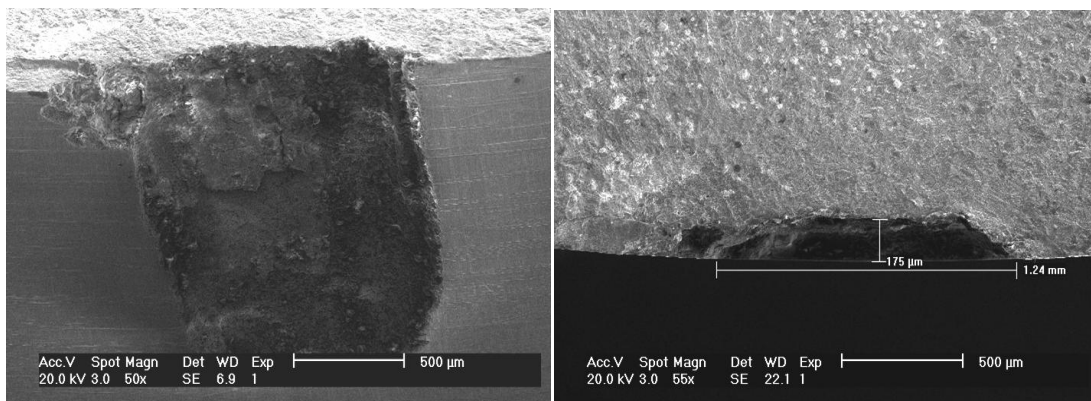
Larger scale fatigue specimen 2 – Dimensions of the flaw where the fatigue crack initiated
